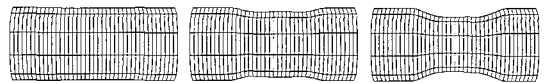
Deformed shape of tube with elastomer thickness of 2.5mm during elastomer forming process
